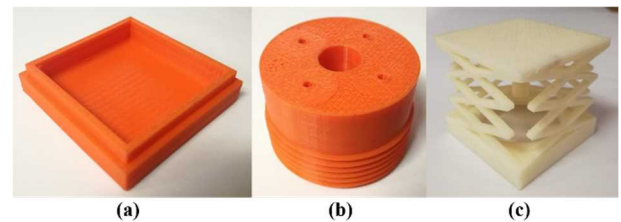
3D Printed sensor parts (a) Bottom pad (b) Inner support (c) Square type spring structure
